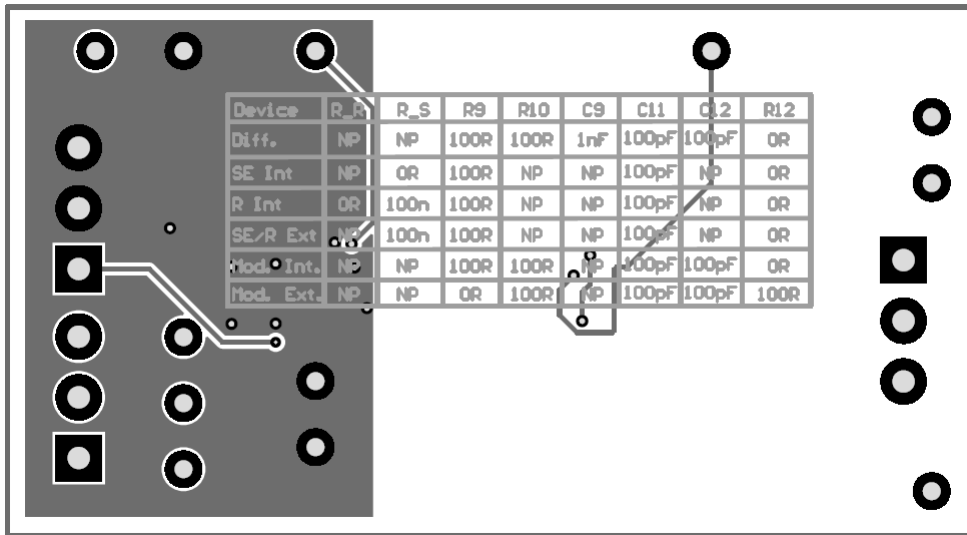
AMC43xxDVVEVM Top PCB Drawing
